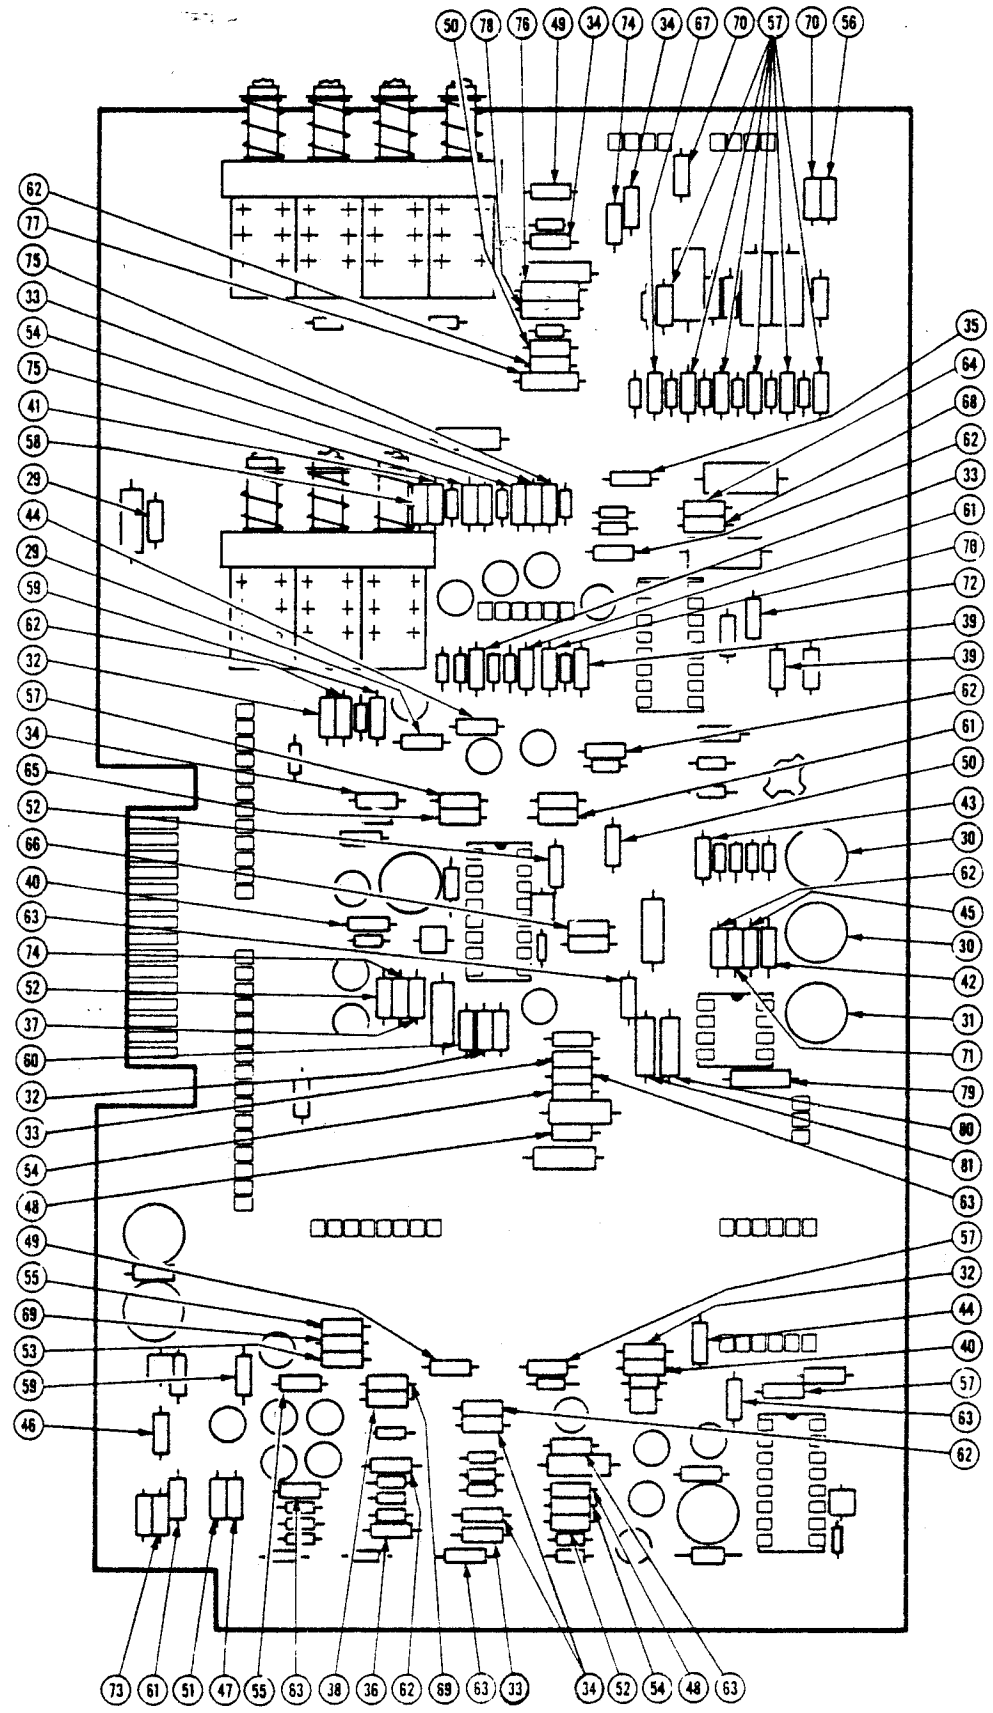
A8 Circuit Board Assembly, Sweep (sheet 2 of 3).
